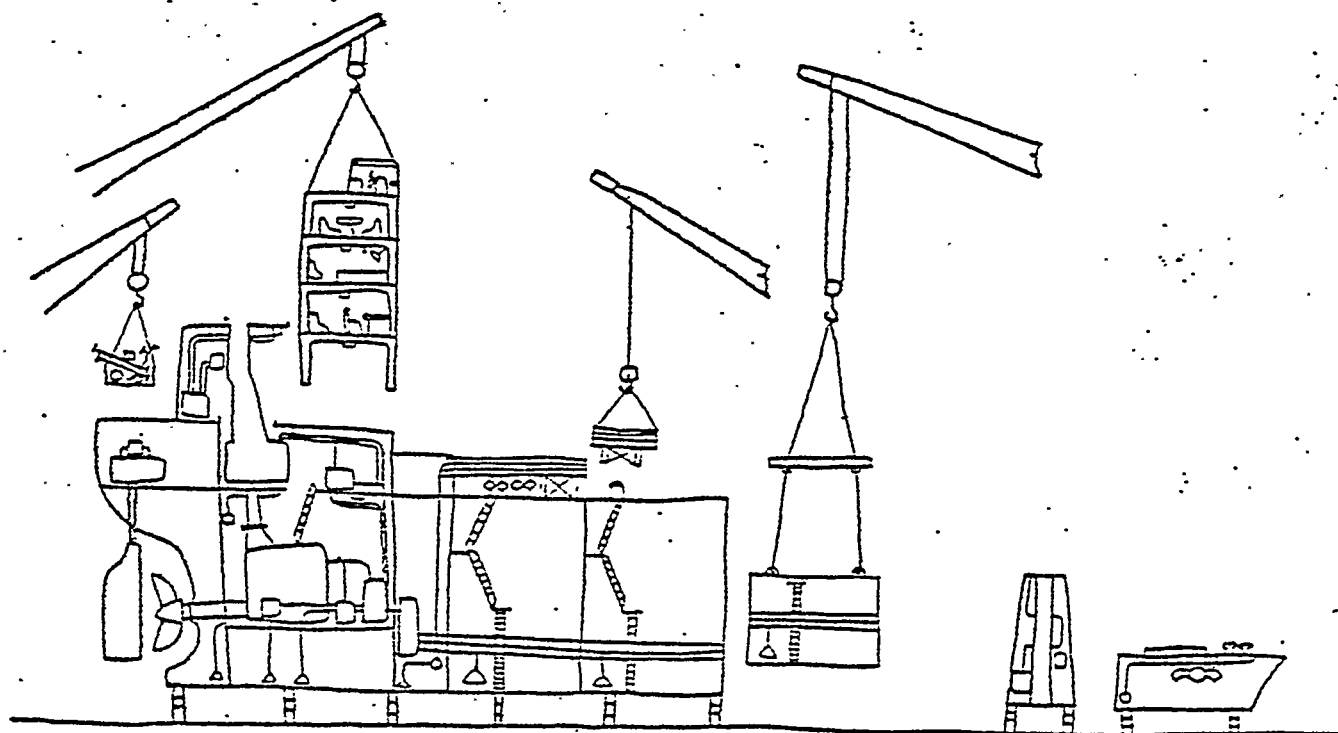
shows ducts, pipes and other fittings right below a ceiling of an accommodation space which are being installed by zone on the turned over block before erection.
